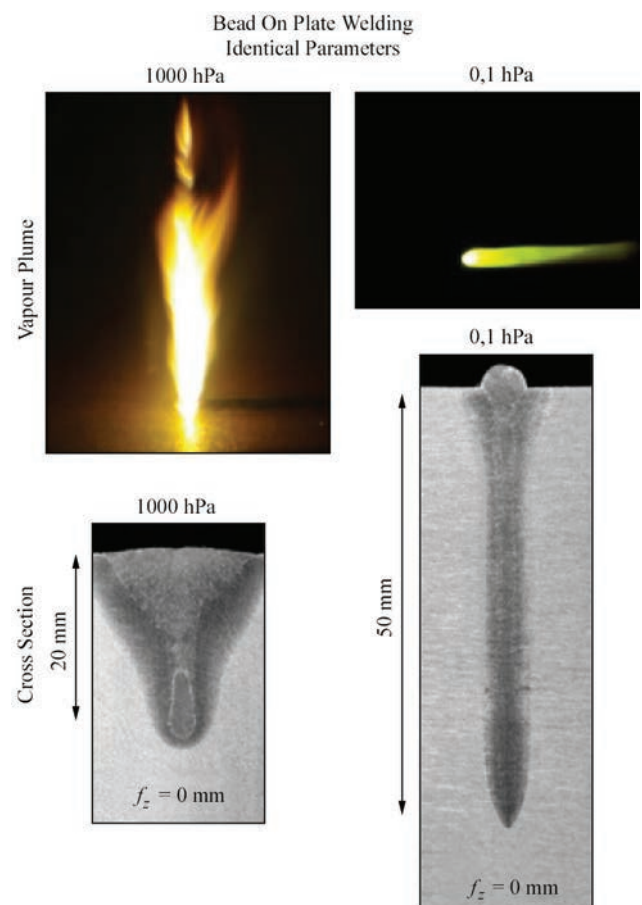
Vapor plume and bead-on-plate welding
